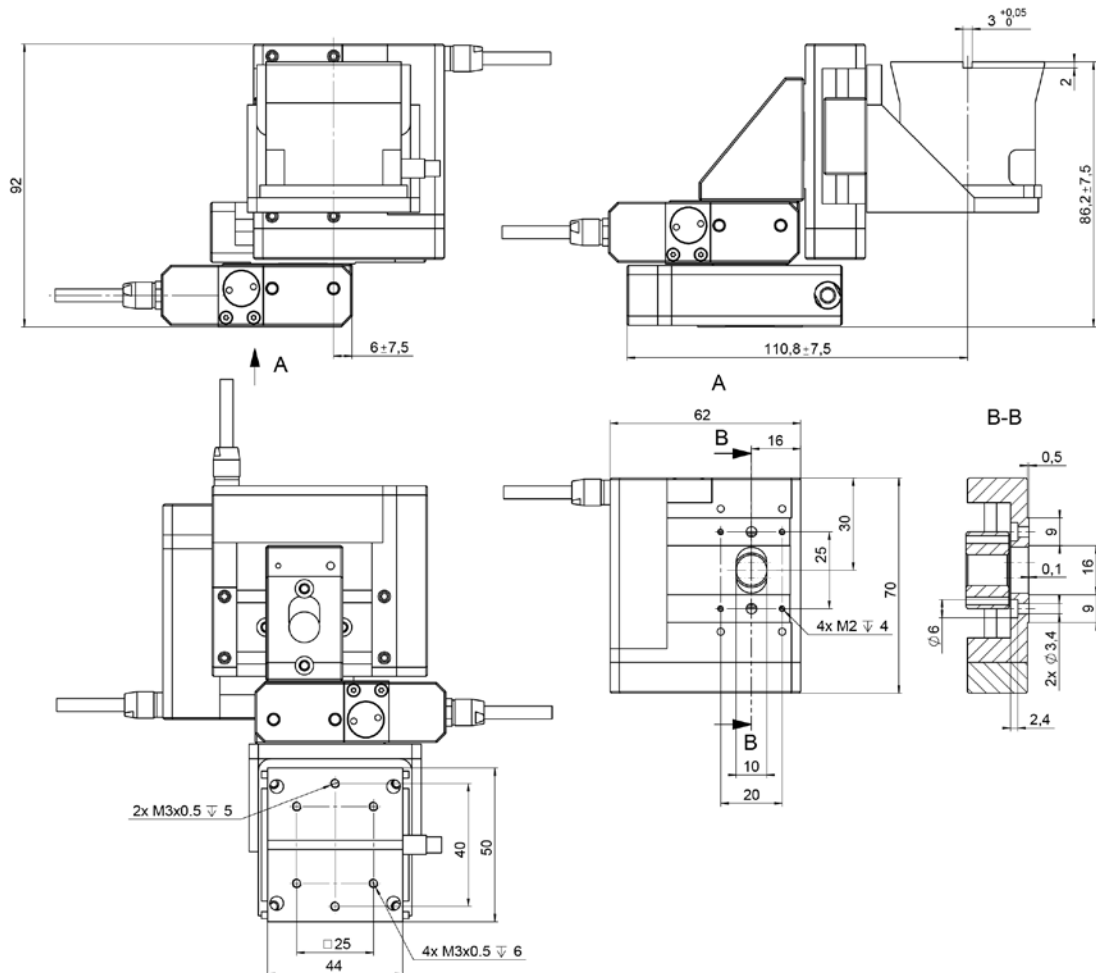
Dimensions of the F-131.3SD1 in mm. Note that the decimal places are separated by a comma in the drawings.
